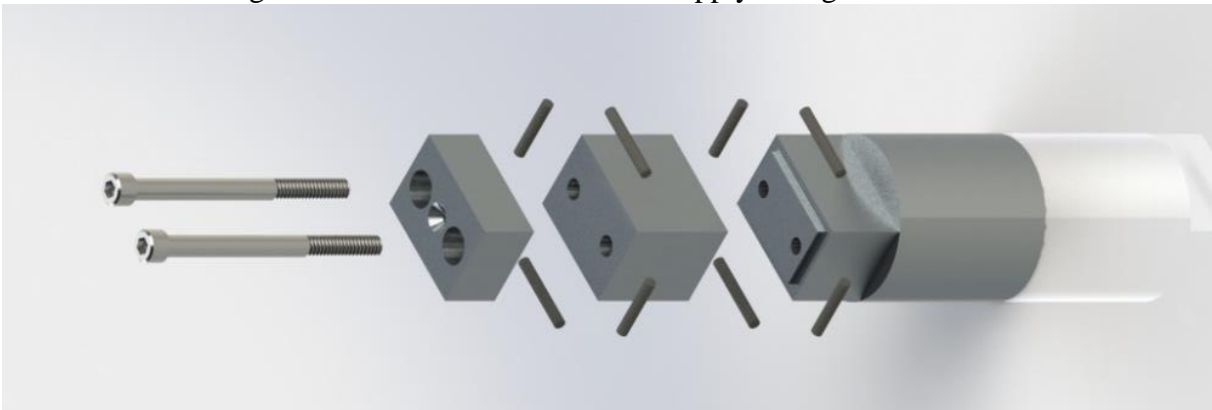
An exploded view of all the metal components that made up the fixture.
